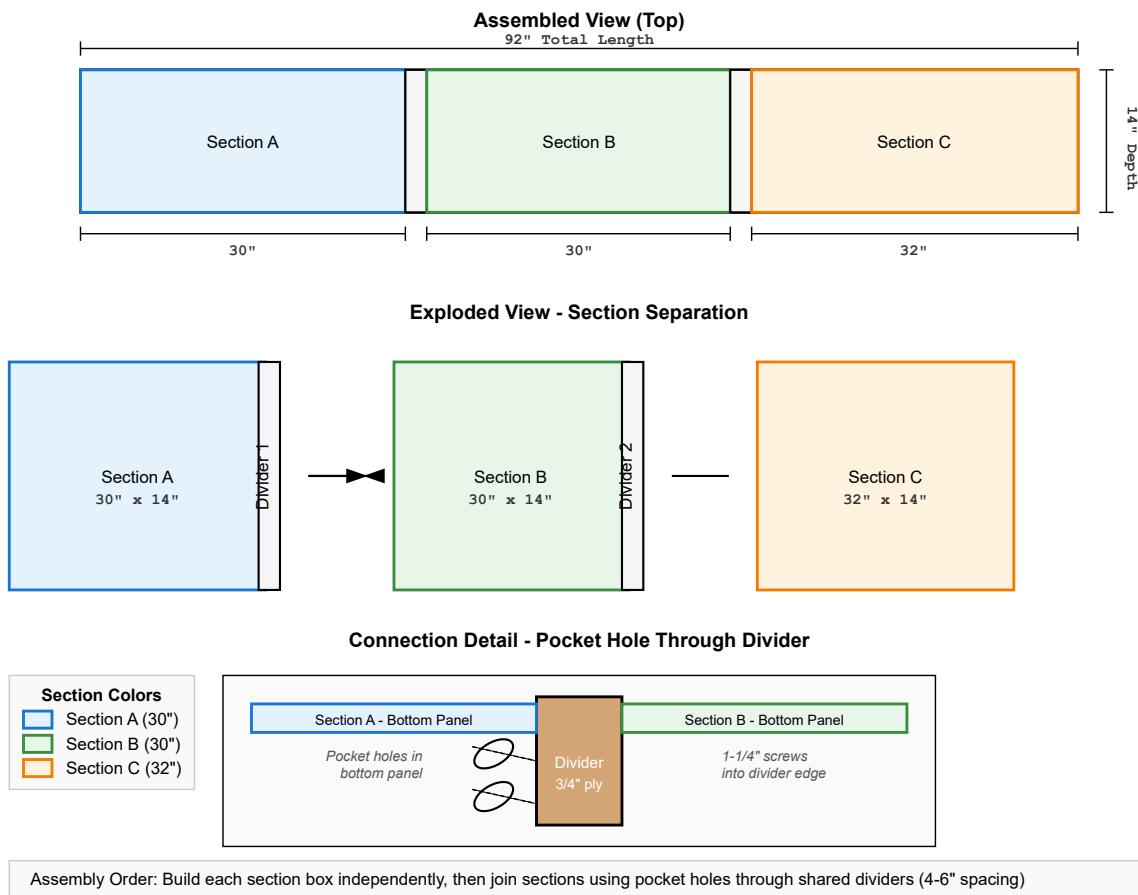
Cabinet Section Layout - Three sections totaling 92" width
